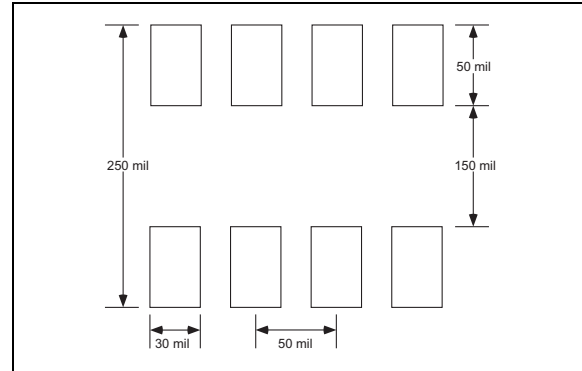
Minimum Recommended SOIC-8 PCB Pads Size.
